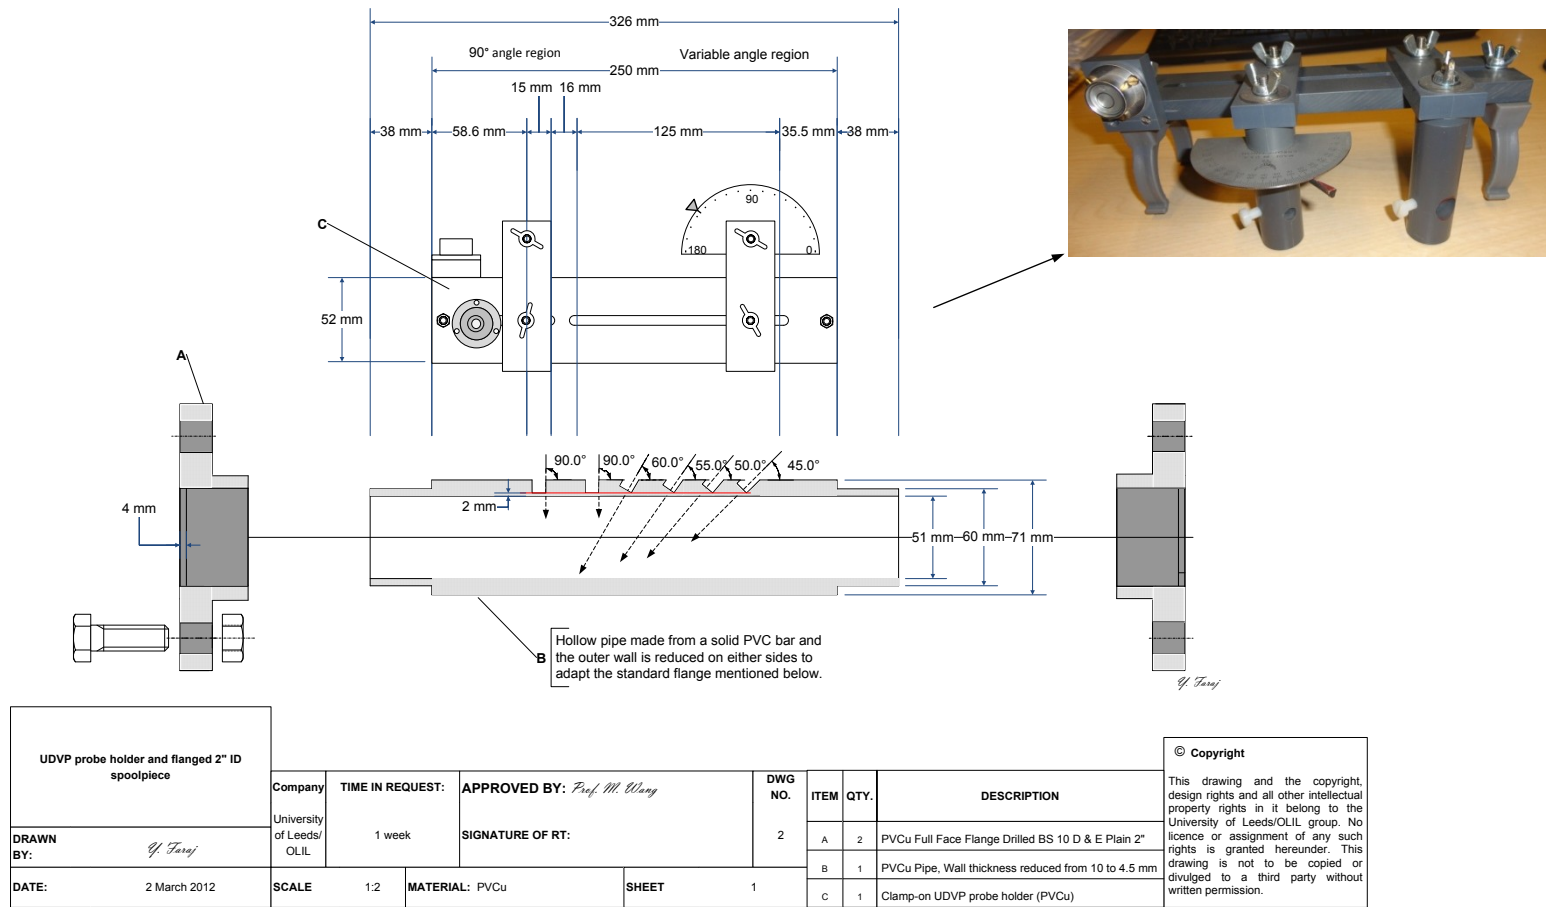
Showing the UDVP probe fixture and 50 mm ID flanged spoolpiece
